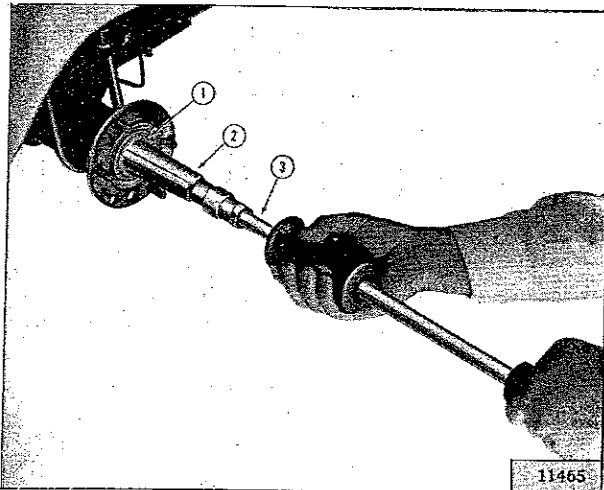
REMOVING TAPERED AXLE SHAFT
